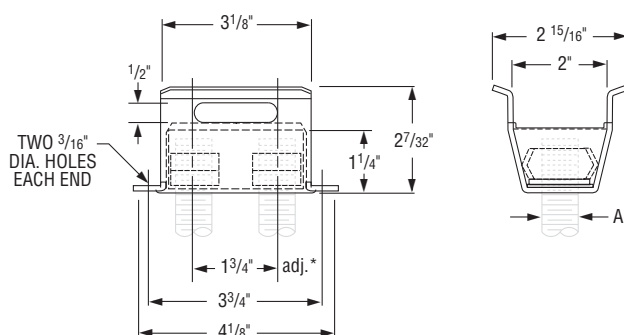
Load (lbs) • Weight (lbs) • Dimensions (in)
